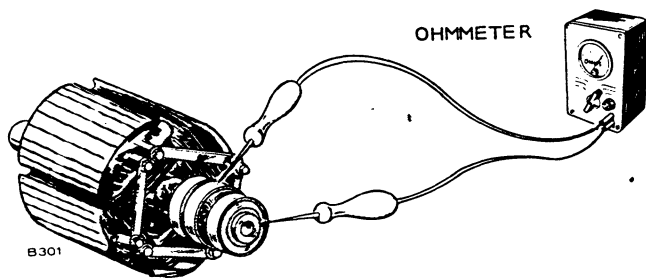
TESTING ALTERNATOR ROTOR WINDINGS
